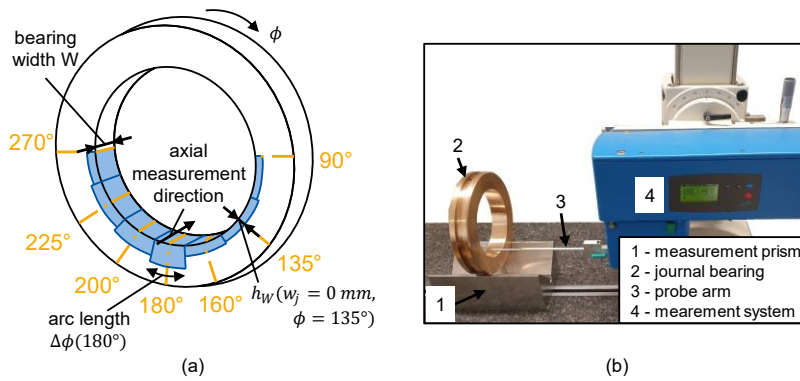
Specification of the journal bearing test specimen (a) and the measurement system (b)
